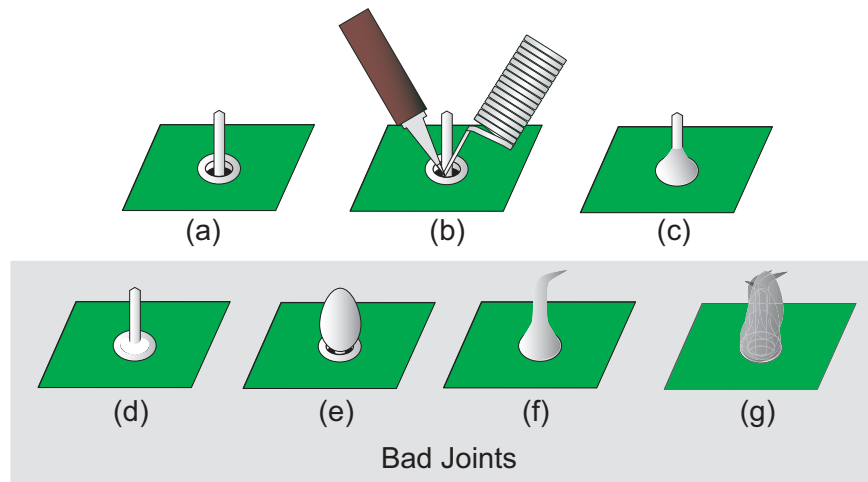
Through-hole Soldering. Beginning with an unsoldered connection (a), add solder while heating both the pin and the pad (b). When finished, the joint should be conical and lustrous (c). Joint (d) doesn't have enough solder; often only a thin membrane of solder is in place, and the joint is very weak. A common result of heating the pin but not the pad is (e), known as a "lollipop joint". These joints can be difficult to spot, since the solder on the pin conceals the missing connection to the pad. Joint (f) shows signs of oxidation: the solder has become sticky and is too thick; it also shows a little "tail". These joints are usually functional, if unattractive. Joint (g) is grotesquely oxidized; the solder has become sludgy and is on far too thick. Adding additional flux and reflowing might fix the joint, but removing the solder and starting over can be necessary.
